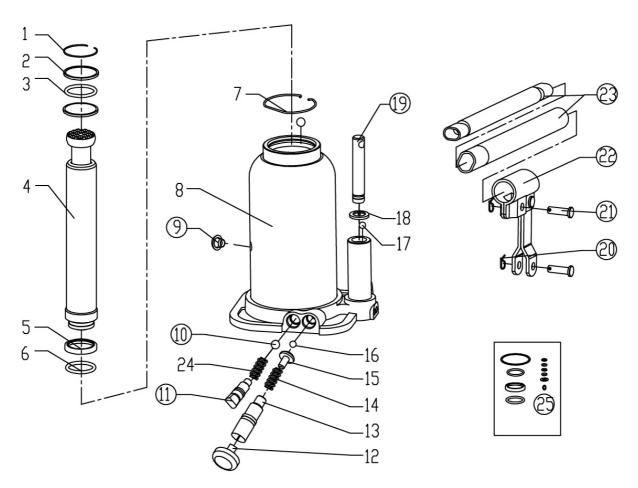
Spare parts drawing HSWH 30 and HSWH 50
